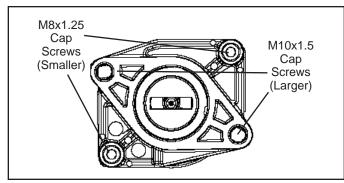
REAR END COVER ATTACHMENT BOLTS
